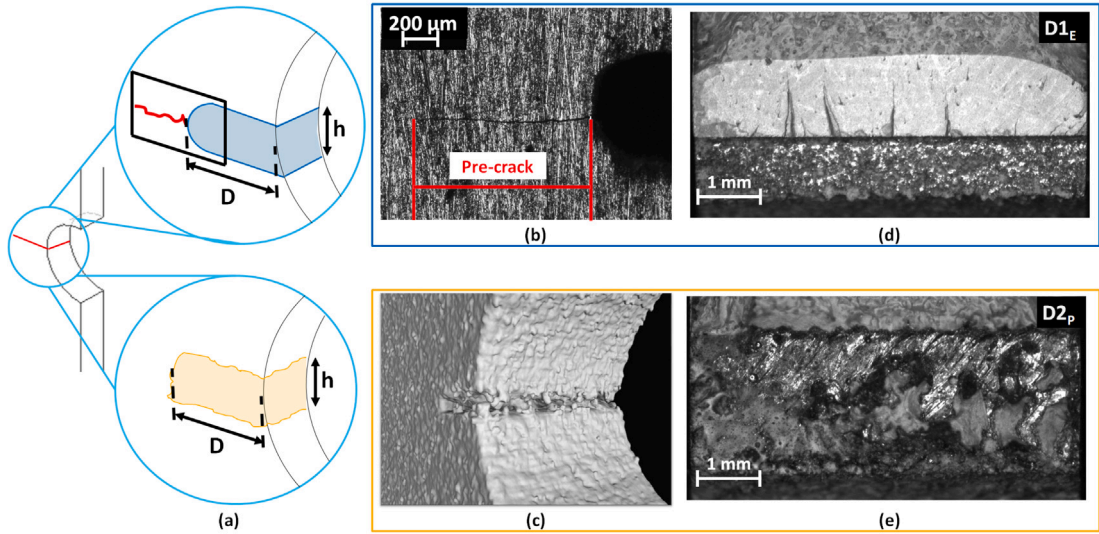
Through defects on T and B benchmark specimens: (a) scheme highlighting the relevant defect dimensions; (b) side view of the pre-crack originating from an EDM defect; (c) printed defect observed with CT-scan; fracture surfaces of the specimens after testing for (d) an EDM defect and (e) a printed defect. For the EDM defect, it is possible to see the fatigue pre-cracking (b) on the specimen flank before the test and (d) on the fracture surface after the test.
